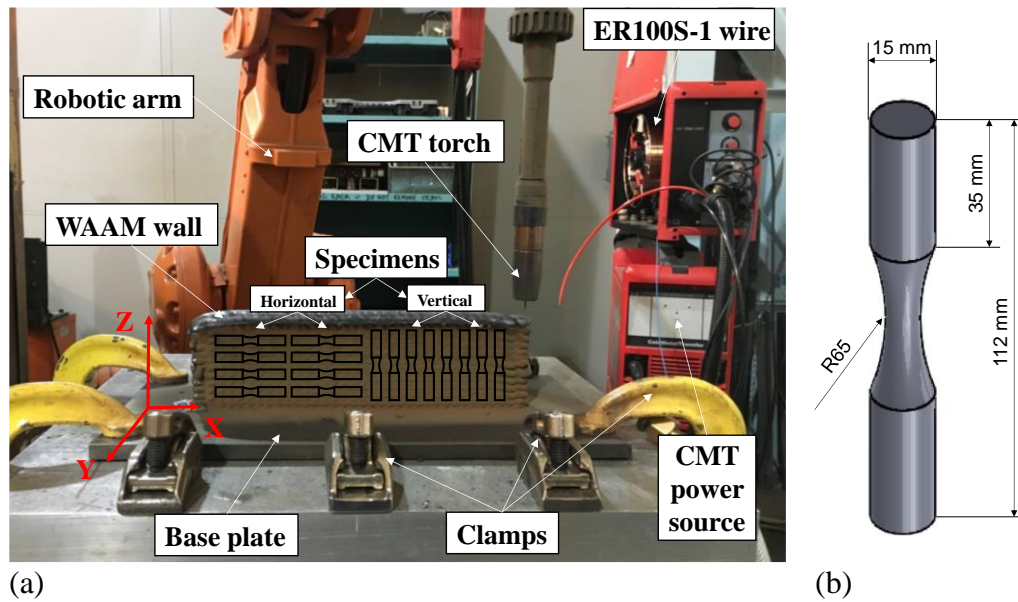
(a) WAAM-CMT system set up with schematic extraction plan for specimens from a built wall, and (b) cylindrical specimen dimensions
